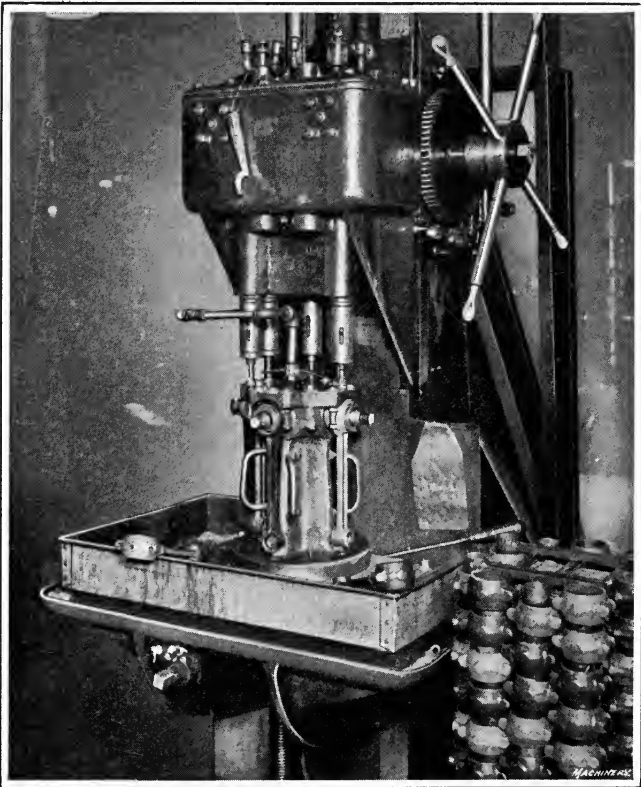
Special Drilling Machine built for Drilling Bolt Holes and an Oil-hole in Connecting-rods
